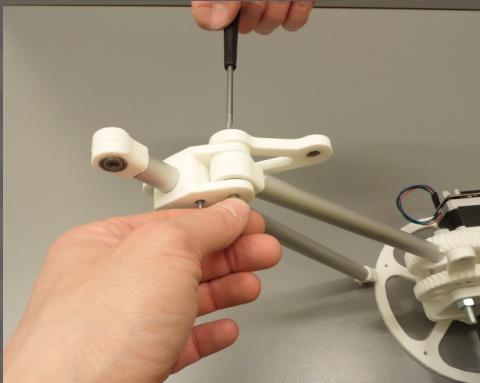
Finish the assembly of the joint by fitting an M5 nut and tighten.
